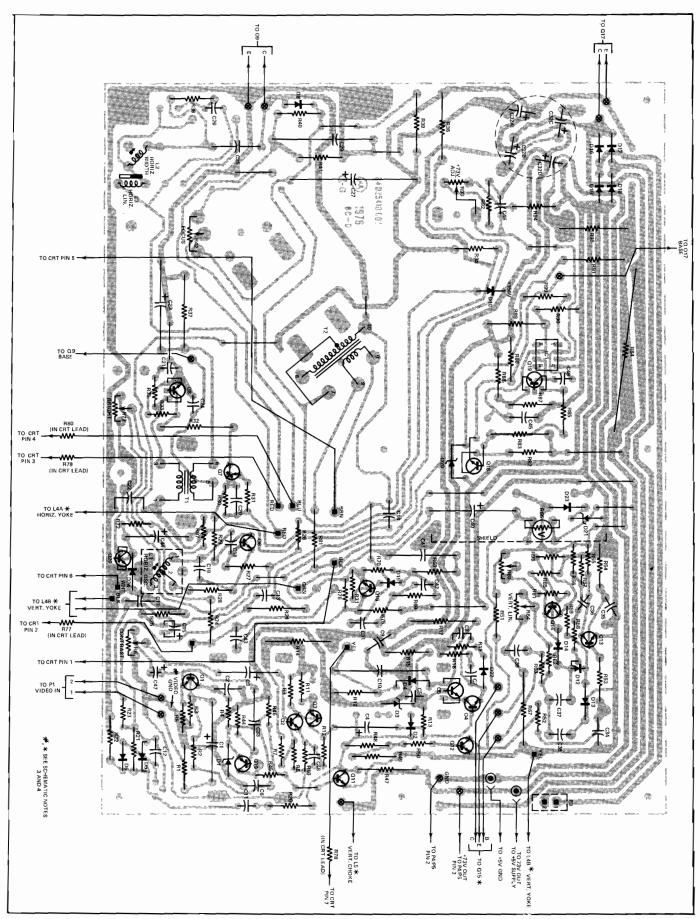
Motorola Monitor Circuit Board Detail—Solder View
